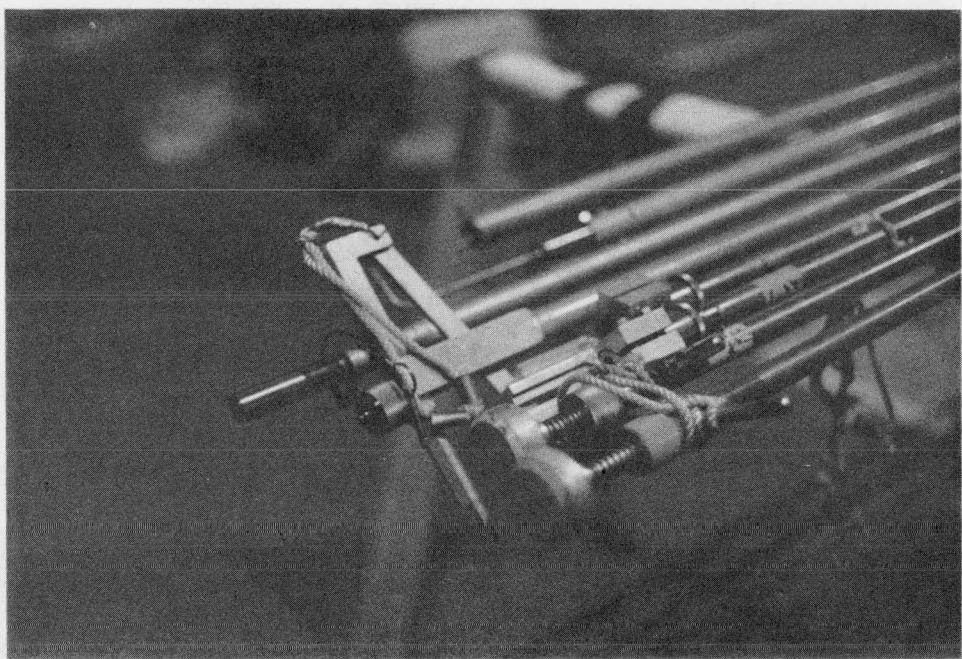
Equipment and Fixtures for Lower Tie Plate Drilling by EDM (Fitzpatrick)
